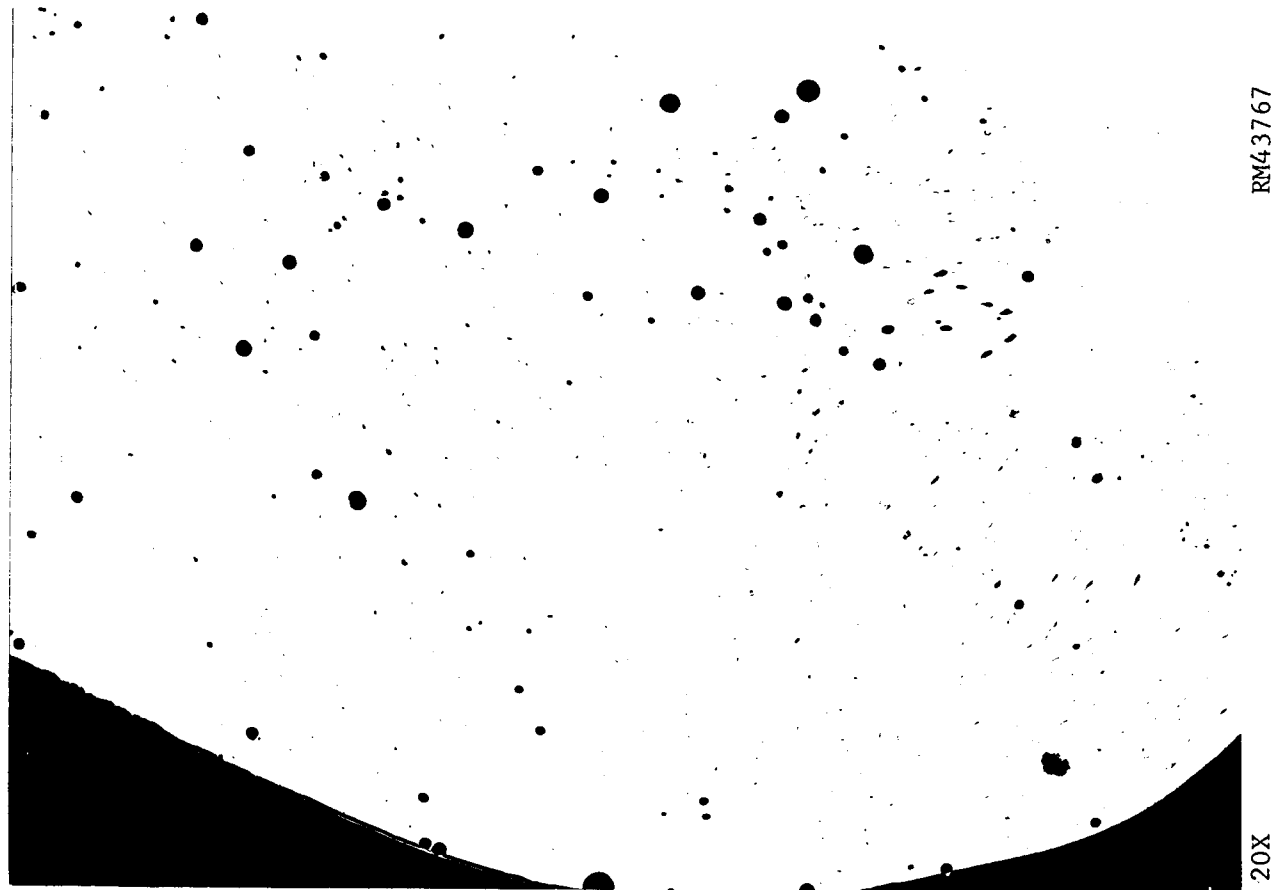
TYPICAL CROSS SECTIONS OF WELDS WITH X4043, TYPE 3 FILLER WIRE
